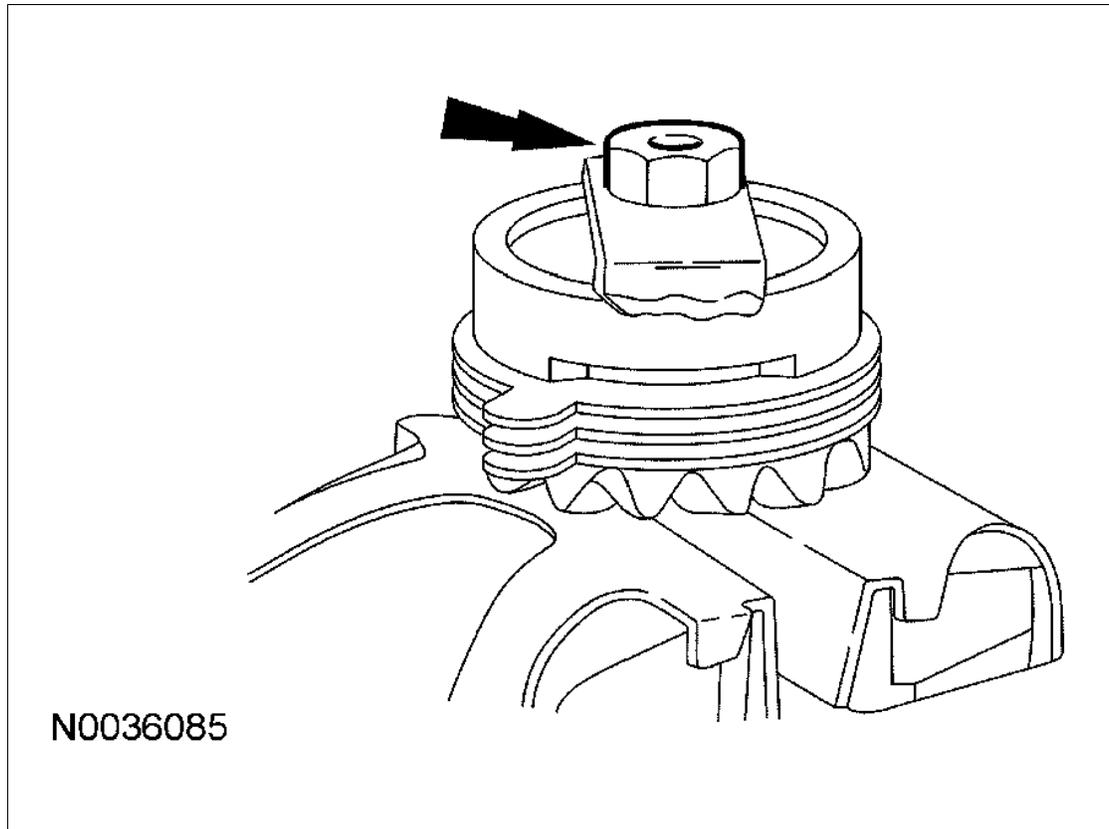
Installing Special Tool Over Disc And Differential Clutch Pack
